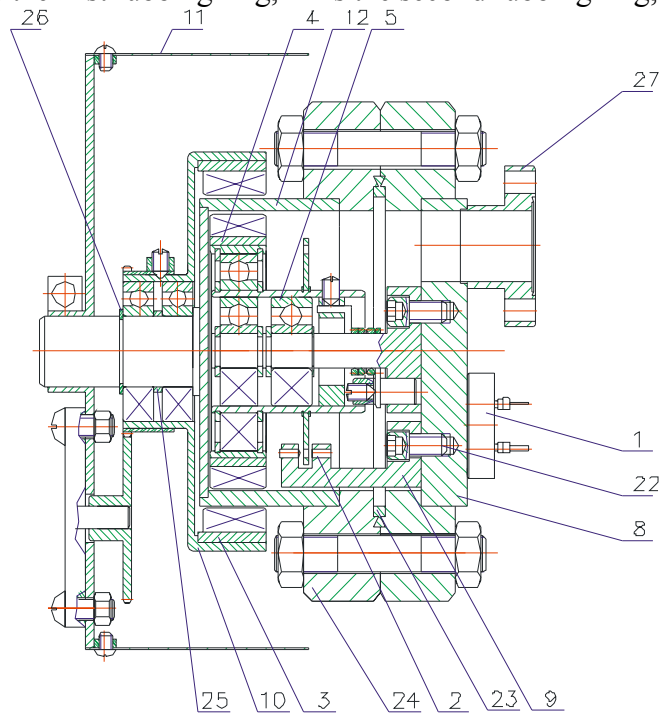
The second scheme of vacuum sensor for ultra wide measurement range [3, 8]: 1 are torque measurement feedthroughs; 2 is a torque photon-coupled pair; 3, 10 is a rotating magnet drive; 8, 9, 11, 12 is a case; 4 is a measuring ball bearing (is tested); 5 are supporting ball bearings; 25 is a rotor; 26 is a shaft; 27 is a vacuum flange.
